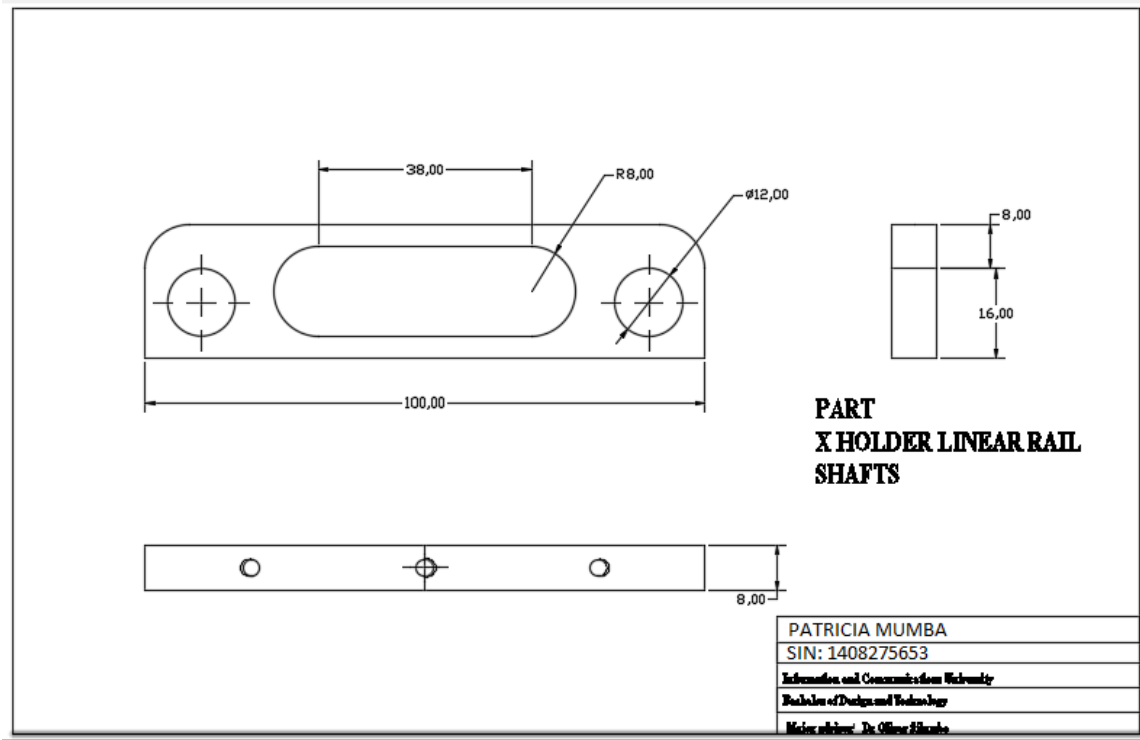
X-HOLDER LINEAR RAIL SHAFT
